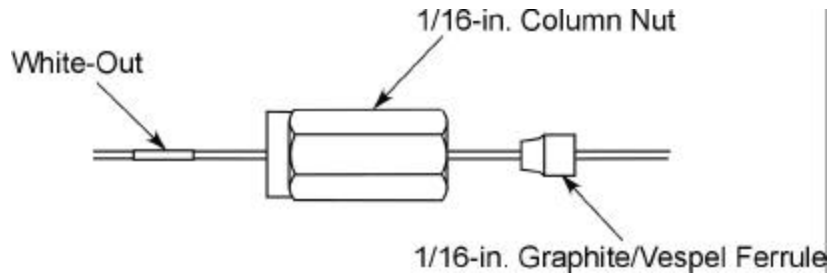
29 Placing a 1/16-in. nut and graphite ferrule over the fused silica line.
